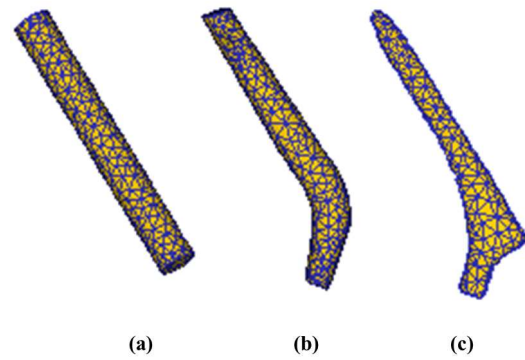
Steps of forming the hip implant production process; (a) primary billet, (b) bending step (preform), and (c) forging step close to the shape of the final workpiece.
